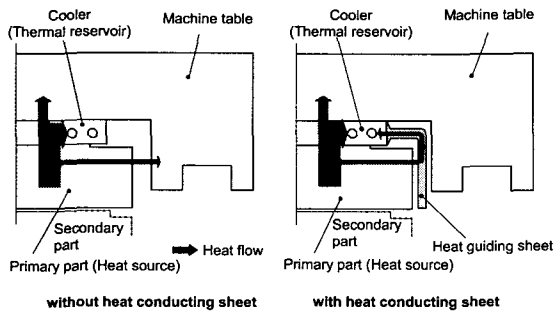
Heat transfer from primary part side to table inside without and with conducting sheet
